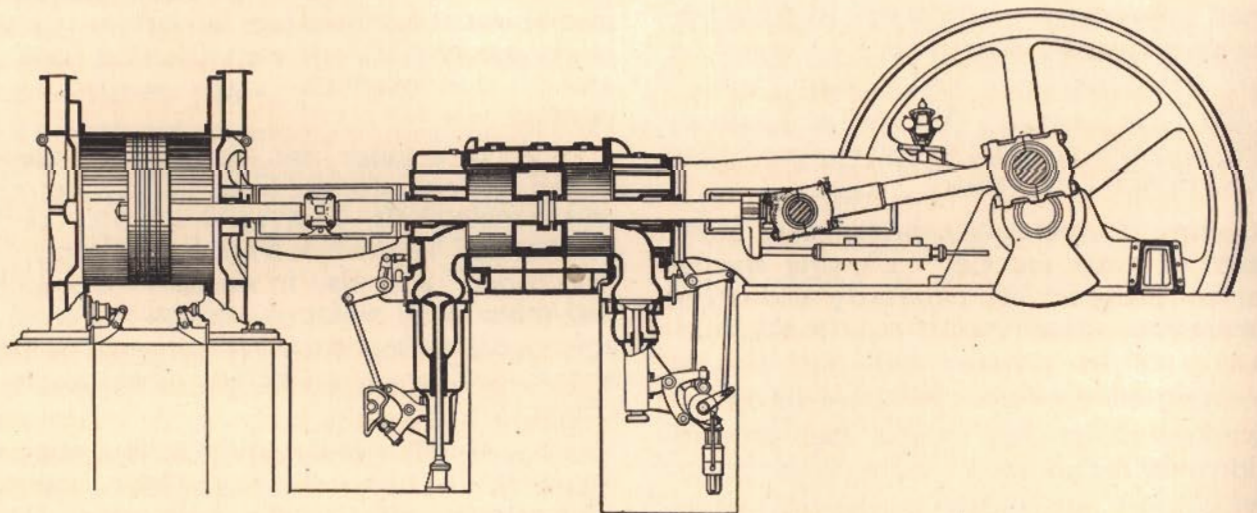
Sectional view of a tandem blowing unit, operated by a double acting gas engine
